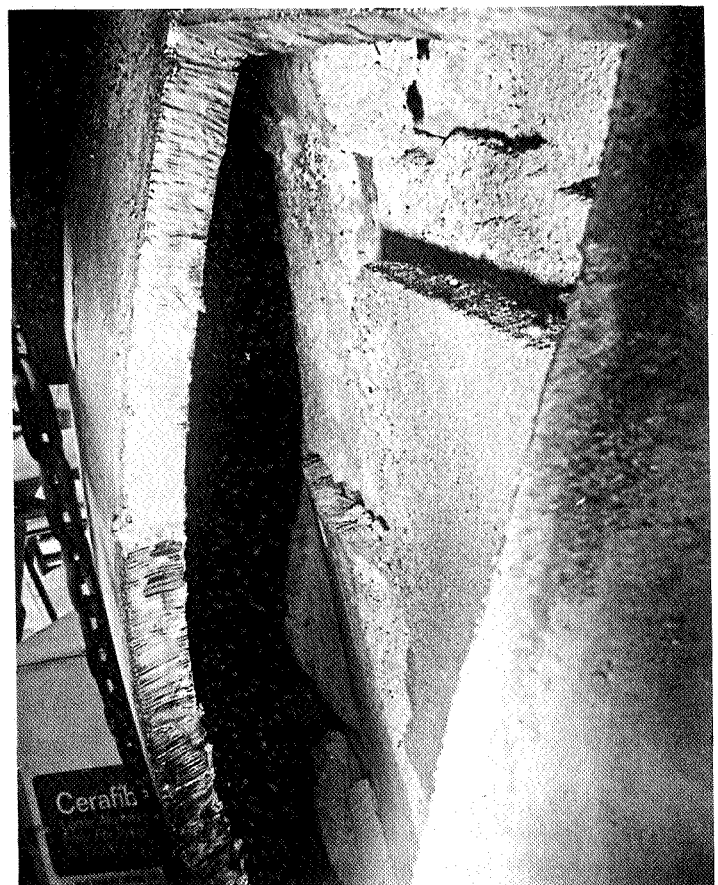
Secondary reformer — refractory inside the bulged section of shell.
